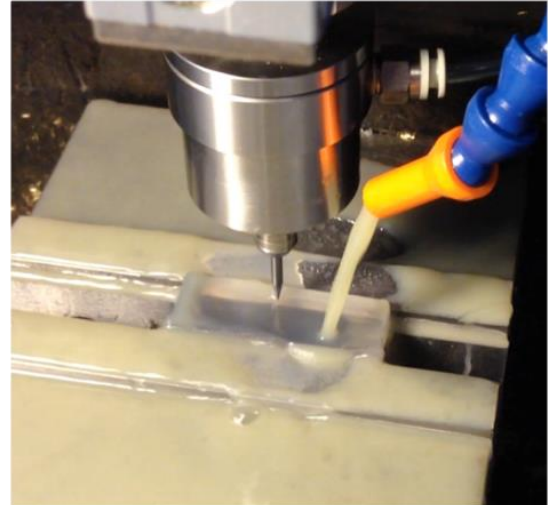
The Prototrak 3-Axis CNC mill utilized a 150,000 RPM spindle that allowed for the use of micro endmills.
